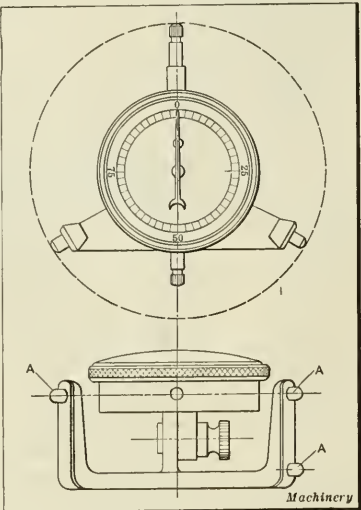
Gas Engine Cylinder Gage having a Three-point Bearing on Its Base
